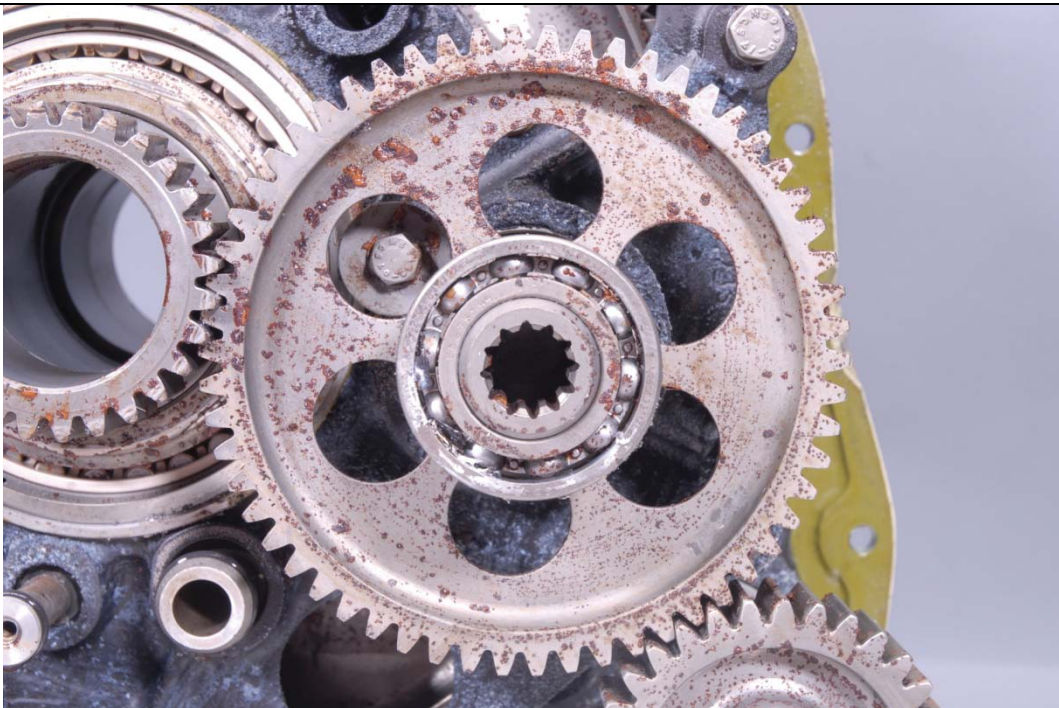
P-79297C, HSP-to-Power Section Coupling Shaft Assembly
